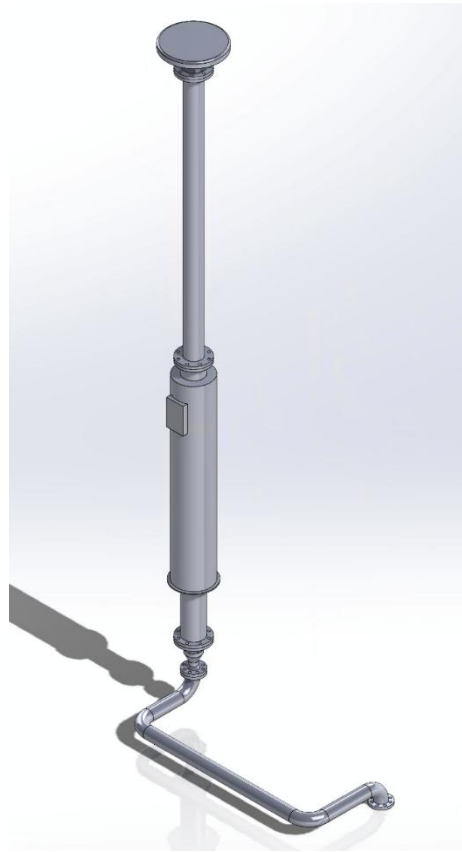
A CAD image of the lube oil demister with the flame arrestor.
